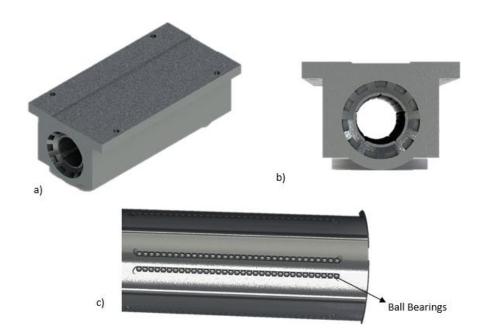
High capacity pillow-block linear bearing: a) isometric view, b) front view, c) zoomed in section view.
